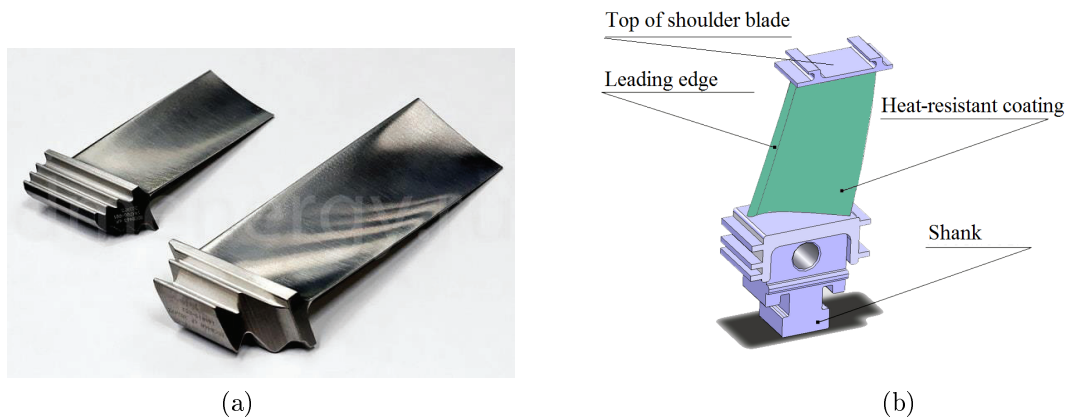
Turbine blades: (a) the appearance of the blades; (b) the structure of the blade
